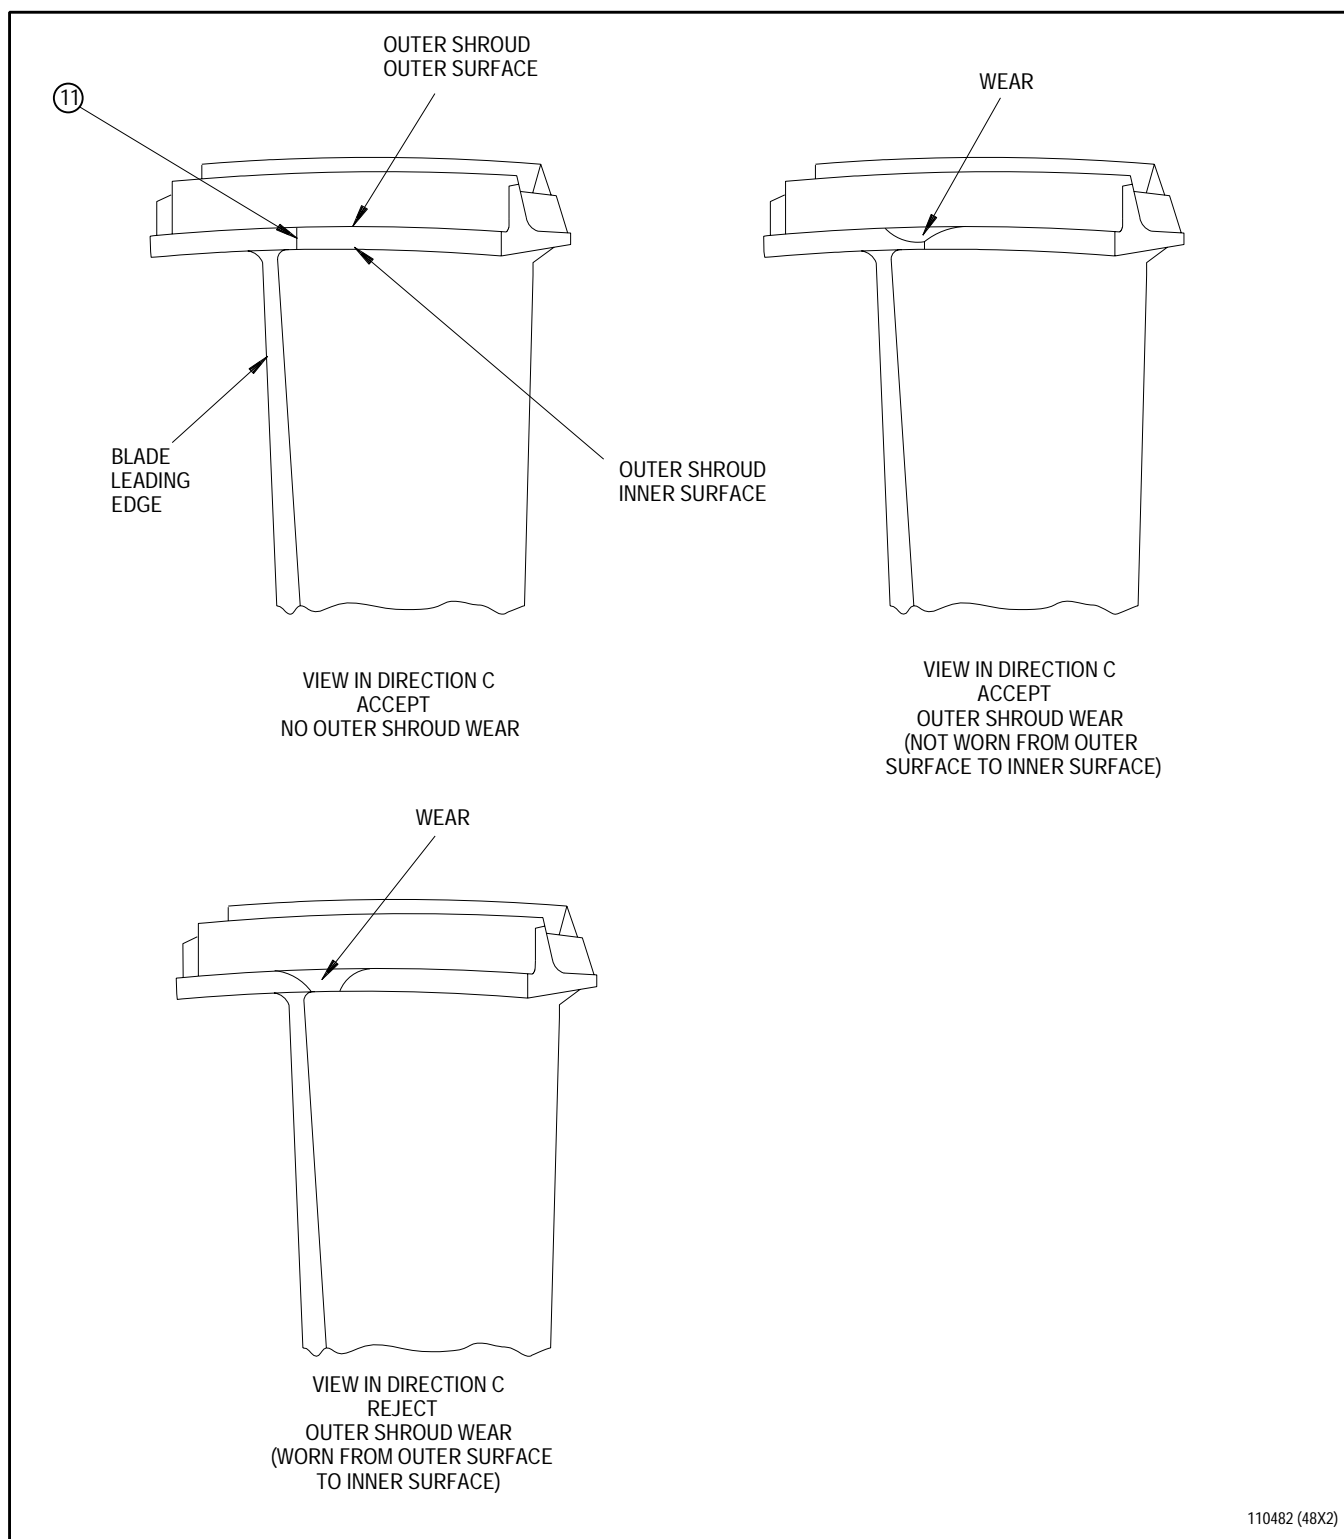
Third Stage Turbine Rotor Blades - Inspection (Sheet 2 of 2)
